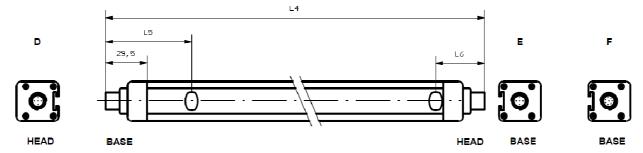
; Chap.:10 Dimensions of Master and Slave models; view of the base and head with relevant connectors; see Tab.:2 and 3
